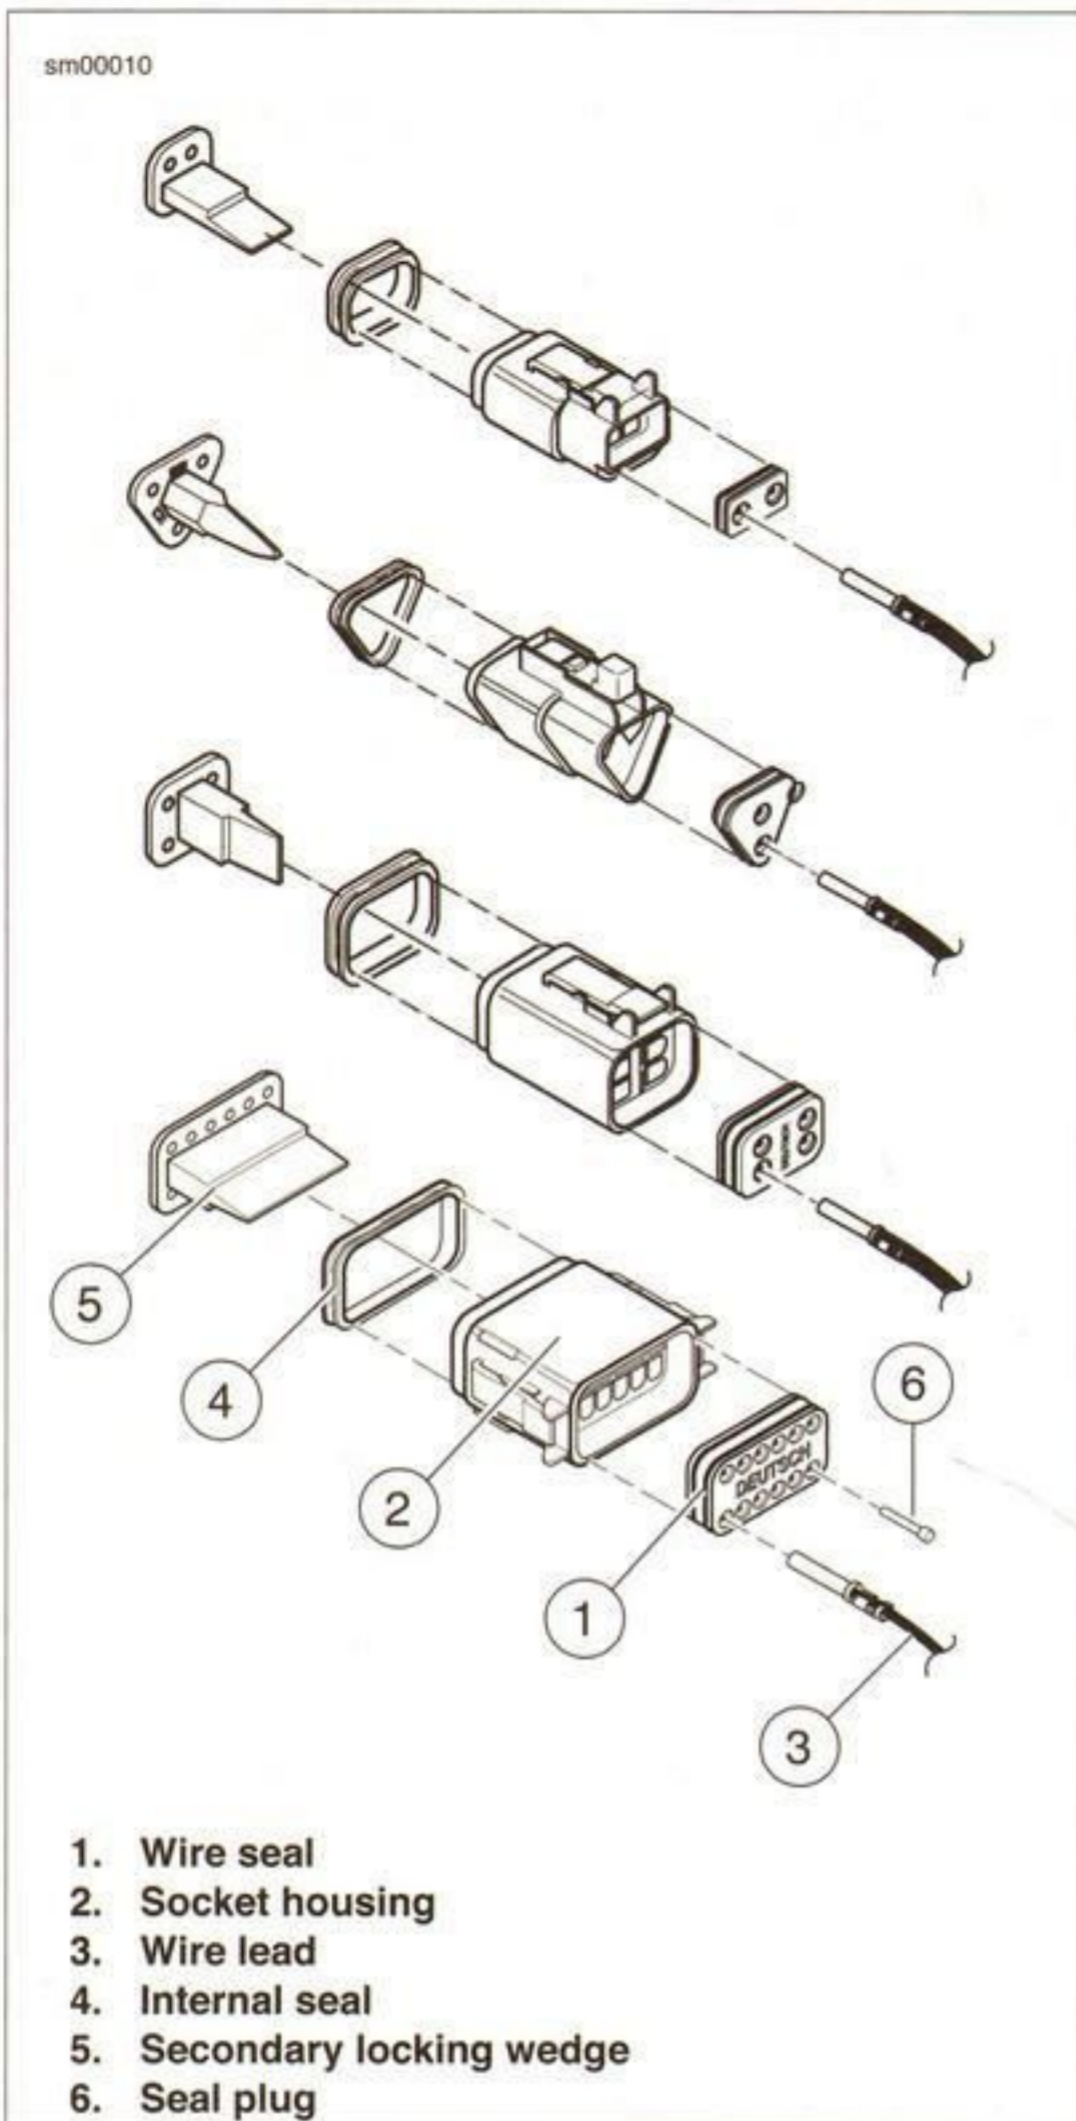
Deutsch Connector: 2, 3, 4 and 12-Place Socket Housings
